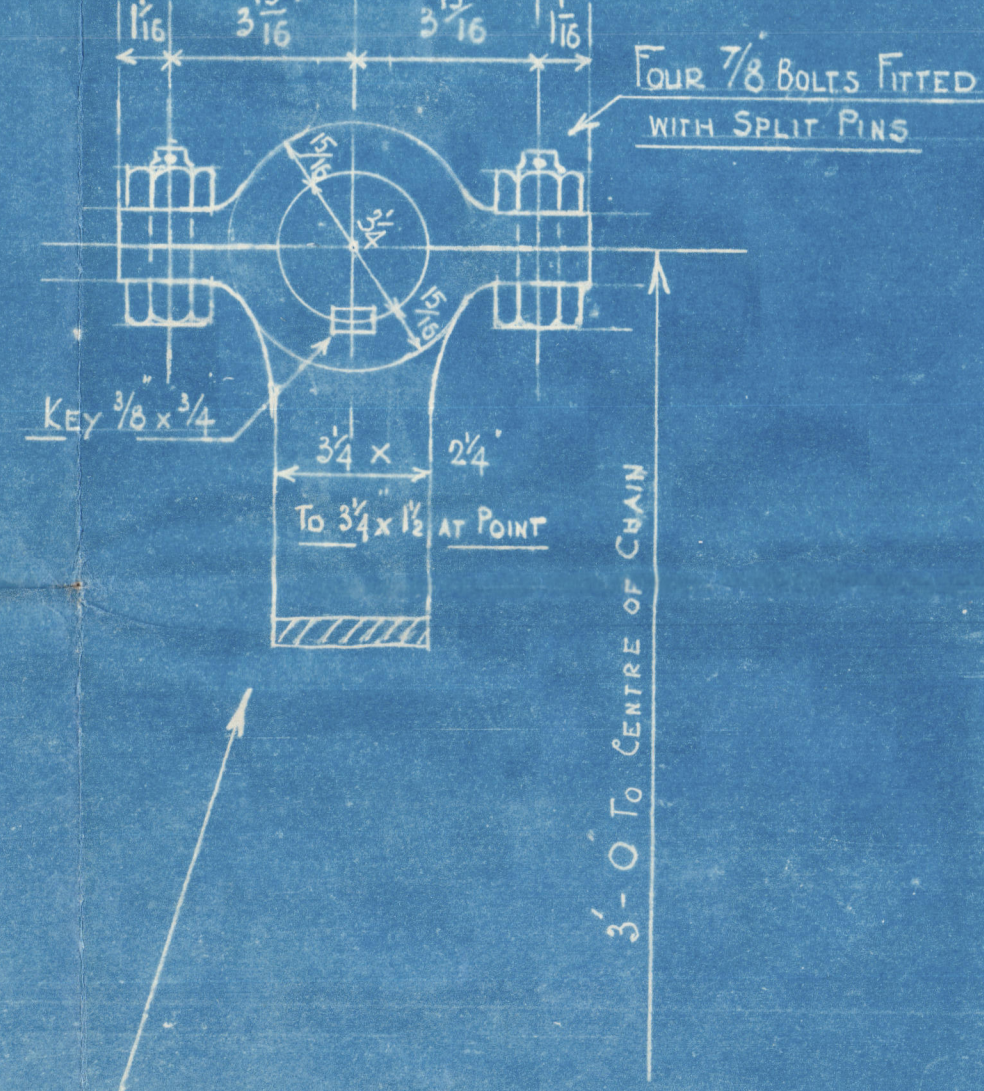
DETAIL OF INTERMEDIATE RUDDER ARM & BEARING PINTLE
